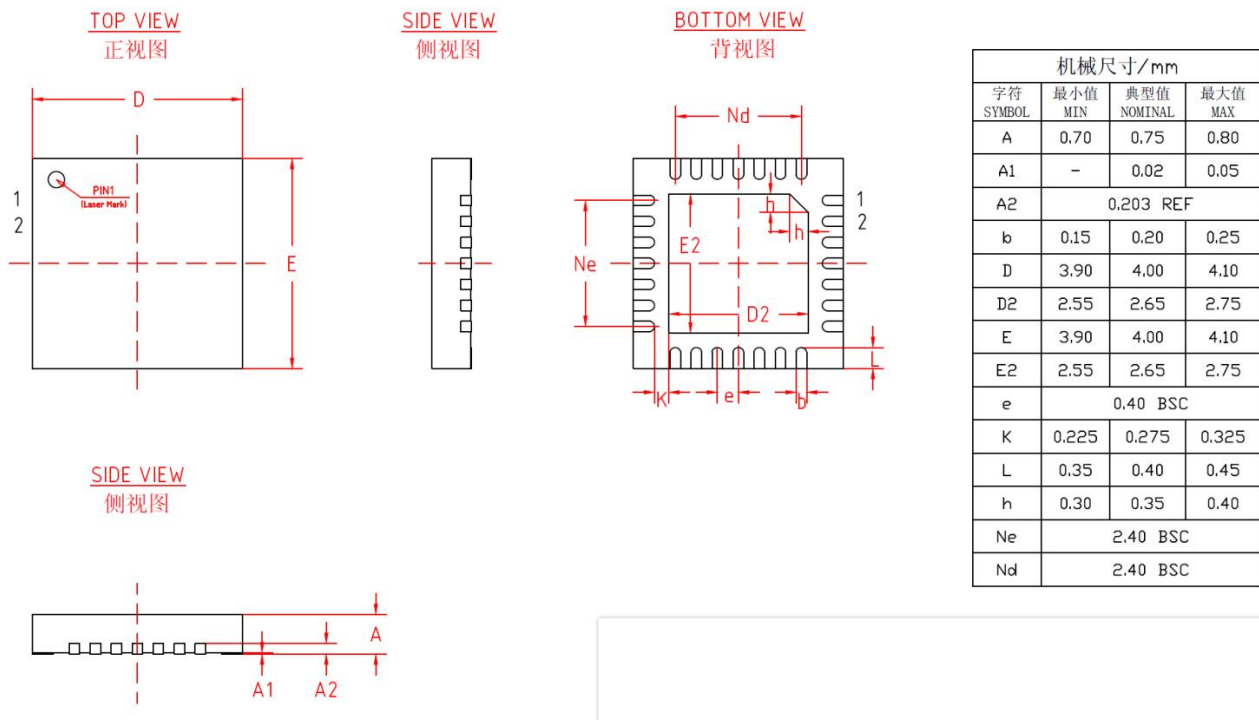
PAN3029 QFN32 4*4 chip package dimensions
